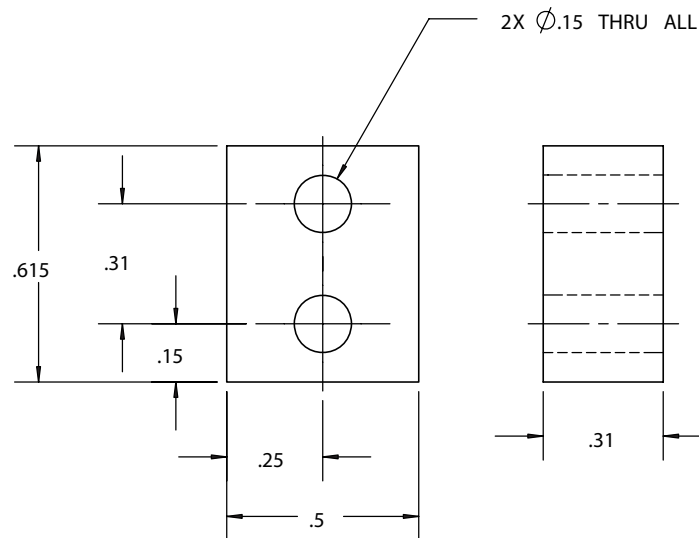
Drawing of the extensometer standoff. Dimensions in inches unless otherwise noted.
